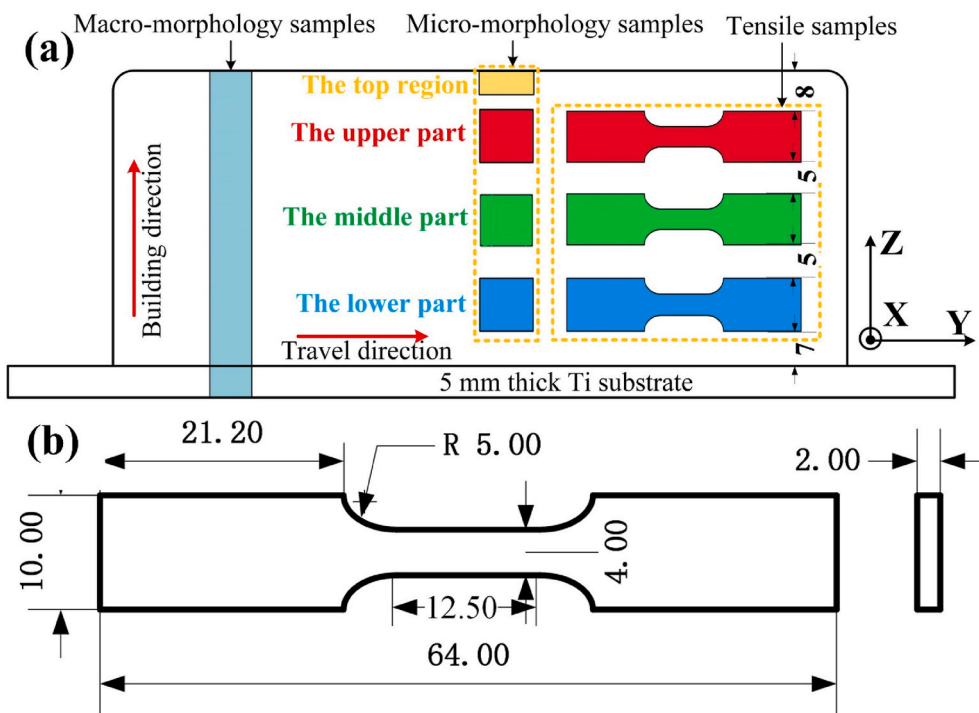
The schematic of sampling location and dimension of tensile specimens: (a) sampling location for material characterization, (b) dimension of tensile specimen, the unit is millimeter.
